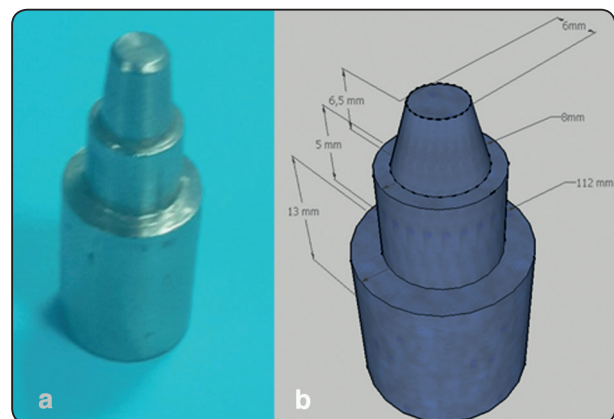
The metal mold (a) and metal mold dimensions(b).
